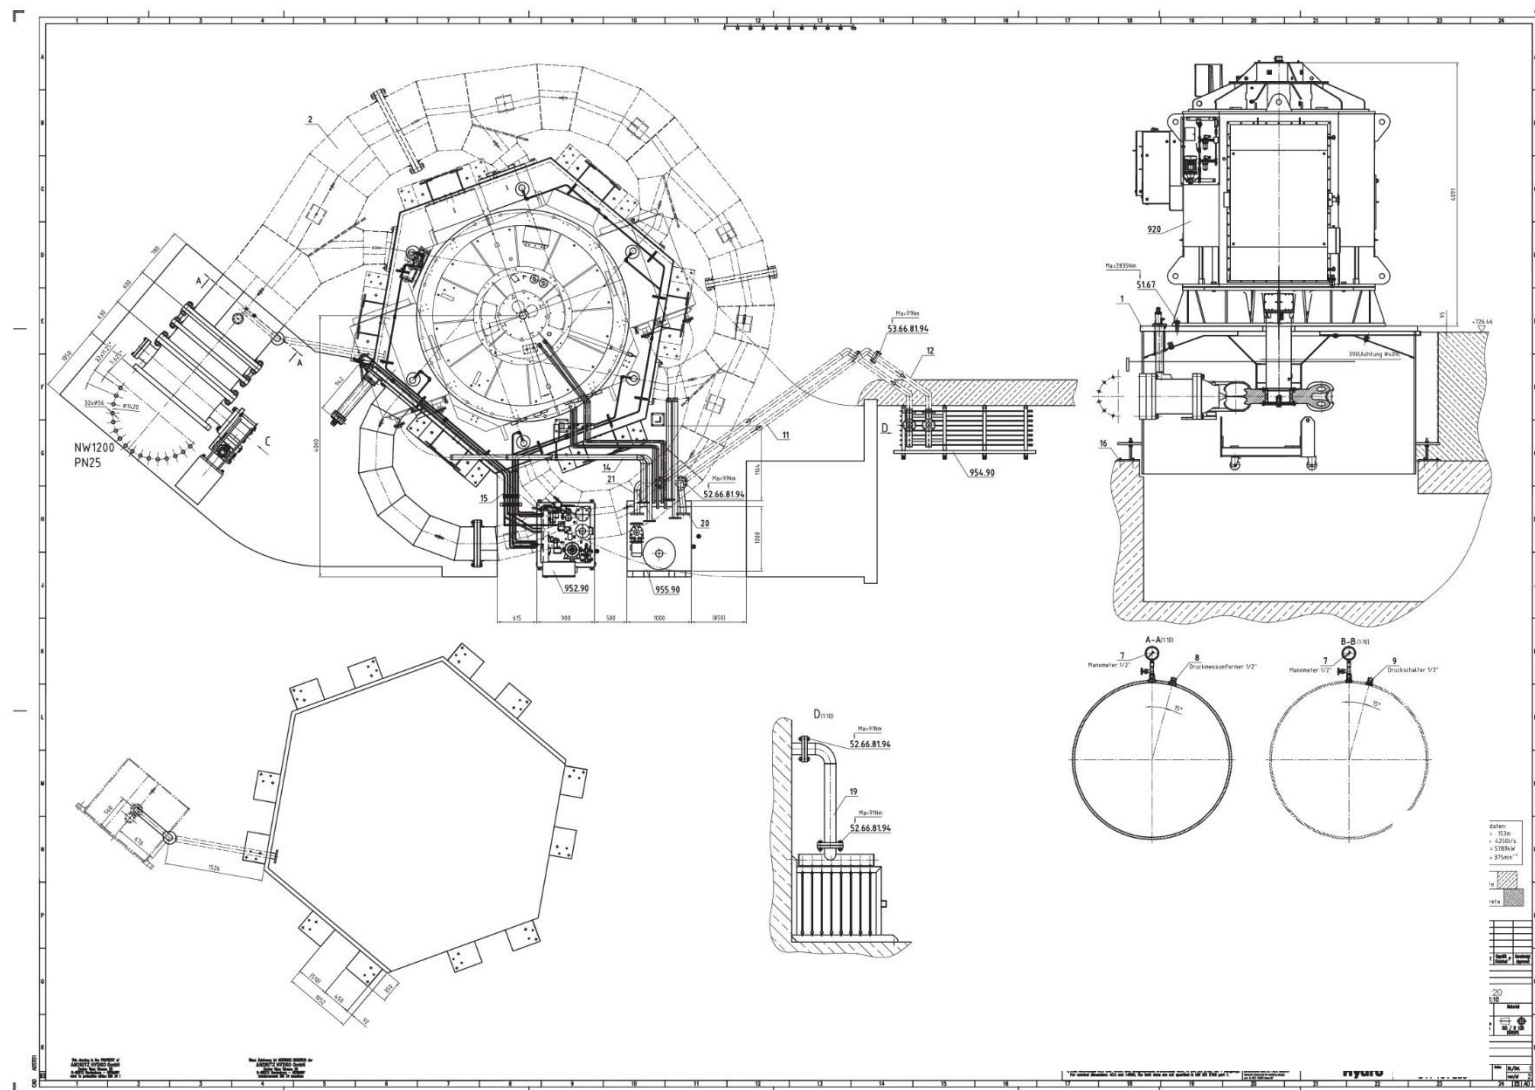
Installation Arrangement of a Similar Pelton Wheel Turbine
